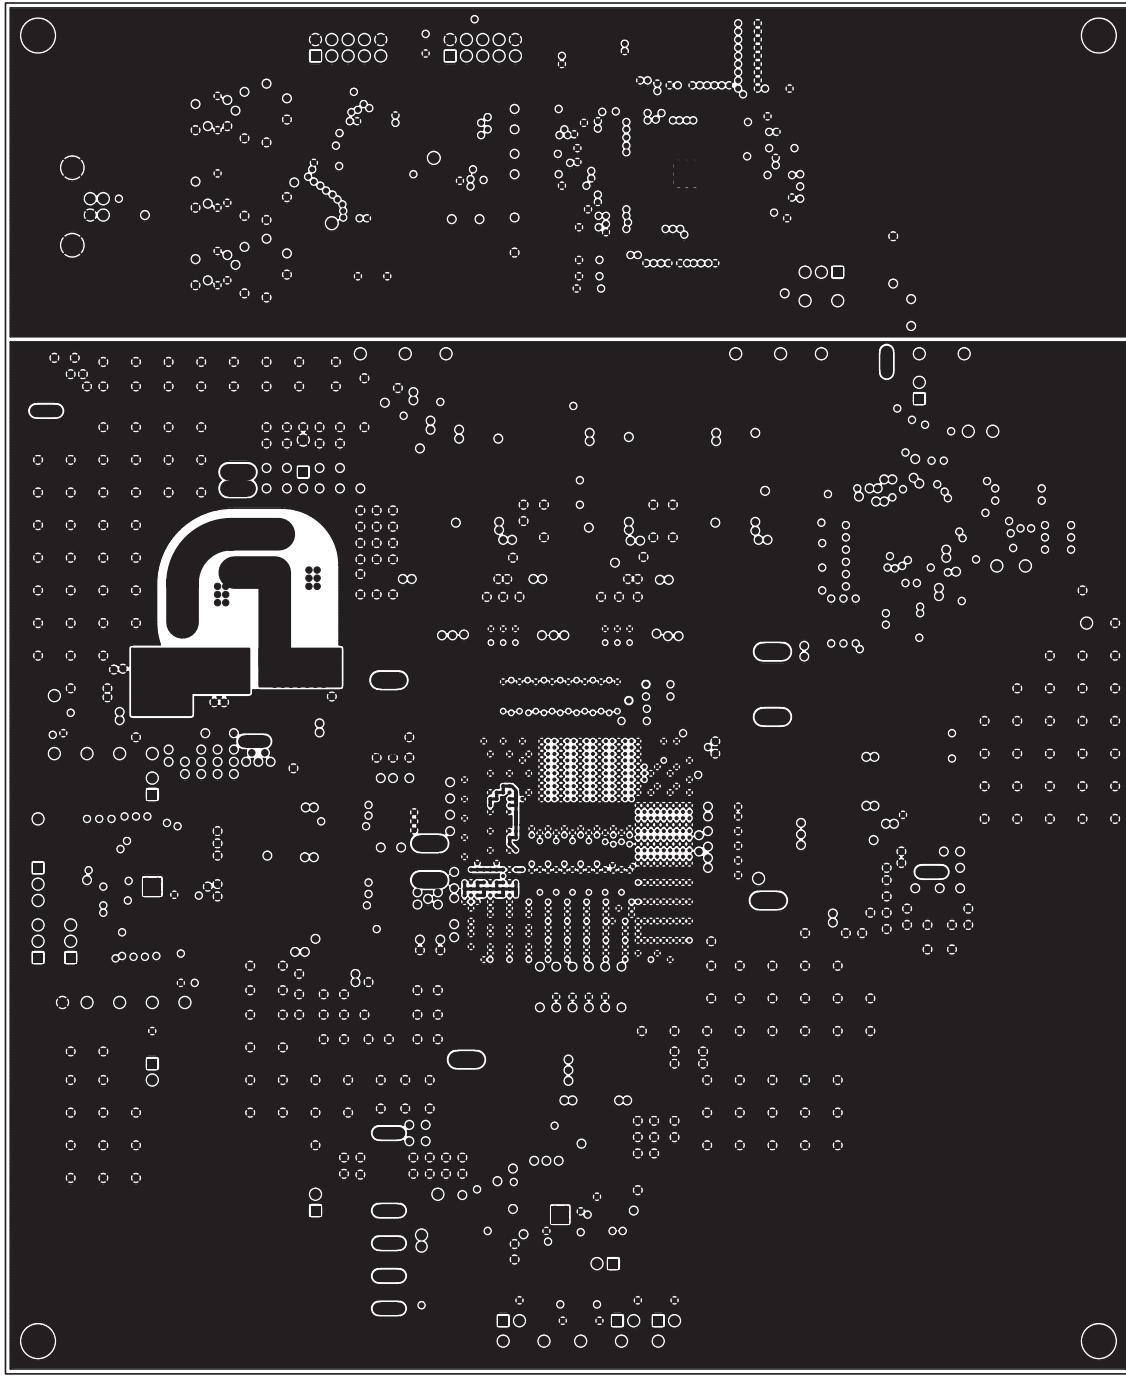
MAX17039 EV Kit PCB Layout—Internal Layer 7 (PGND Layer)
